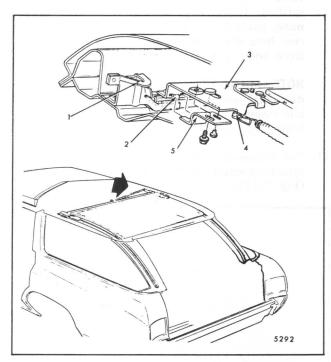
Drive Cable Flag Retainer and Window Lift Spring Details
